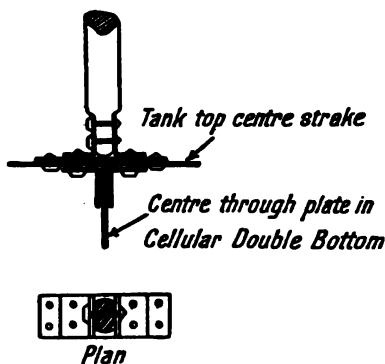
Pillar Foot on Inner Plating of Double Bottoms.
